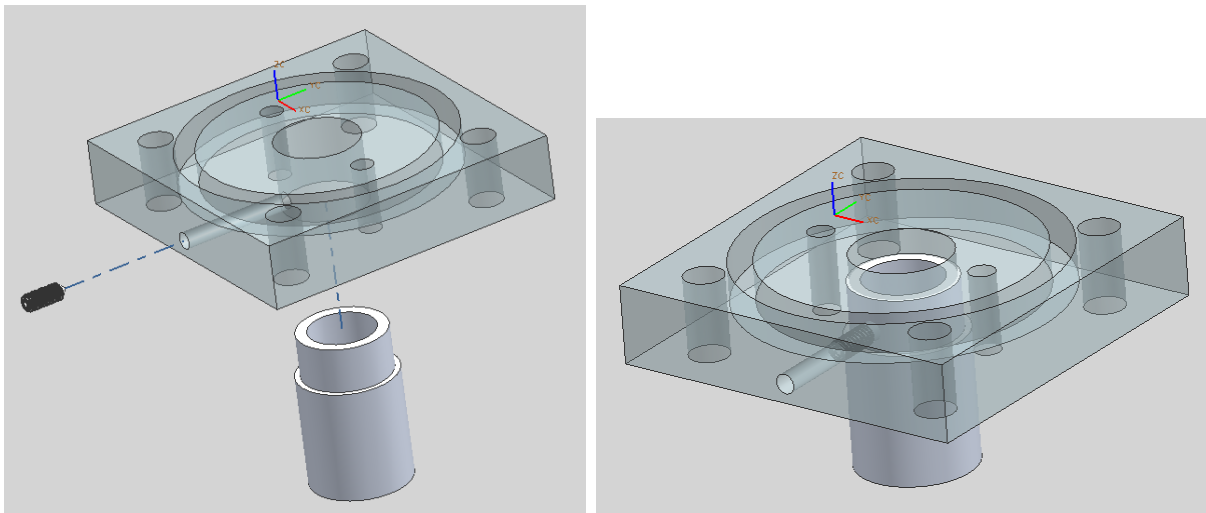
Bottom end cap sub-assembly, exploded view (left), assembled (right)
